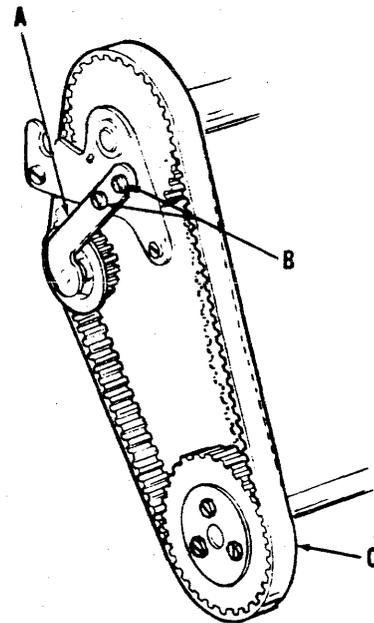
60 CPS PRINT SHAFT BELT TENSION
